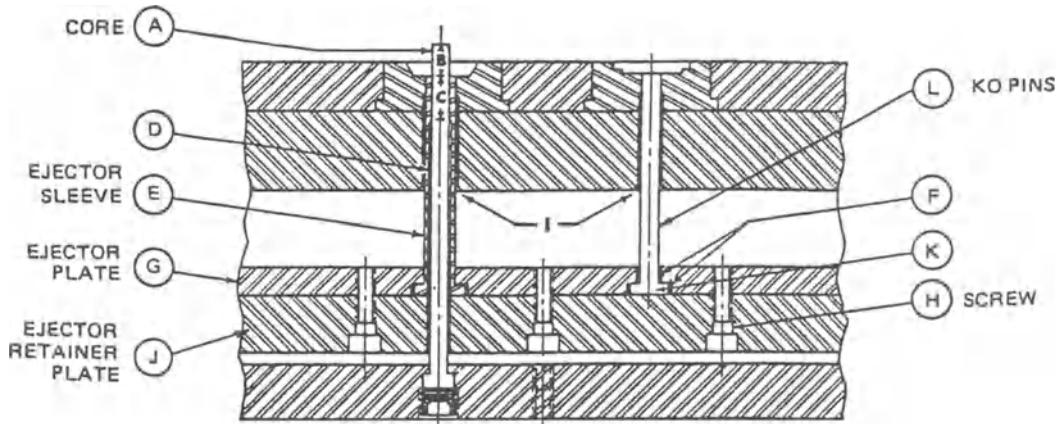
View of ejector (KO) pins, ejector plates, and stripper pin and sleeve.
